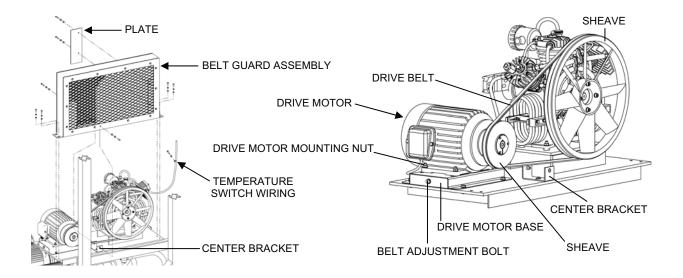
Compressor Drive Belt Guard and Drive Belt Removal.
